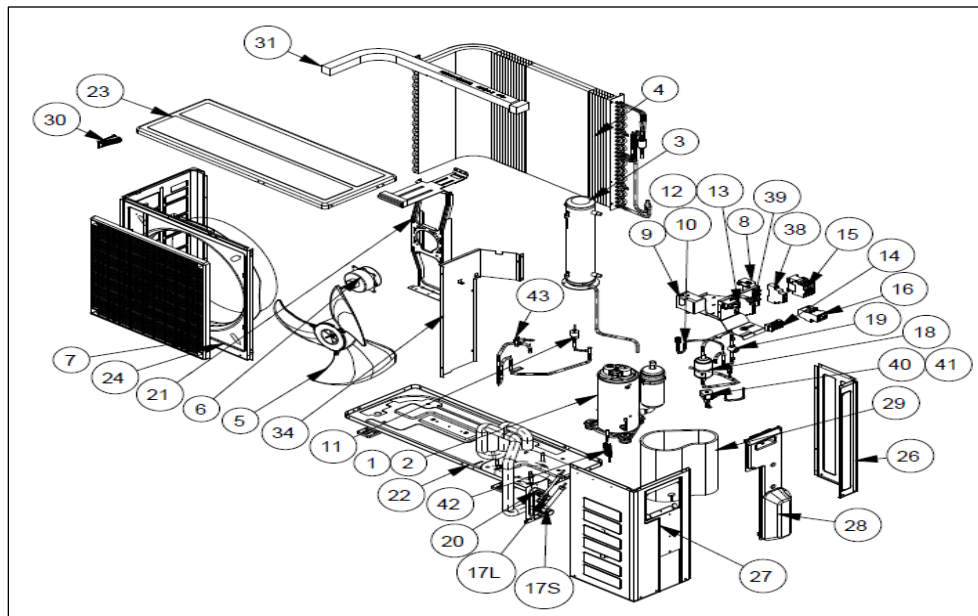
Exploded View LRLSS0351FXY1; LRLSS0401FXY1; LRLSS0501FXY1
